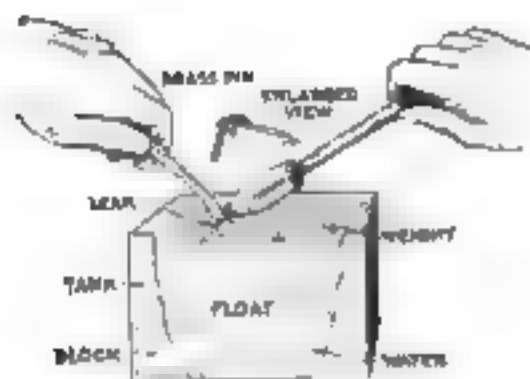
Soldering carburetor or vacuum tank float in this way to make a tight seal
